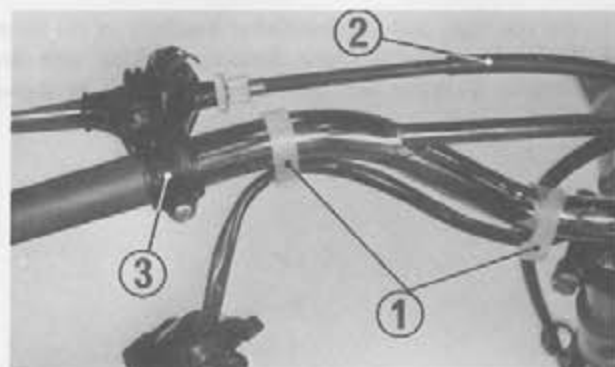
(1) Wire bands (2) Clutch cable (3) Handlebar bracket
